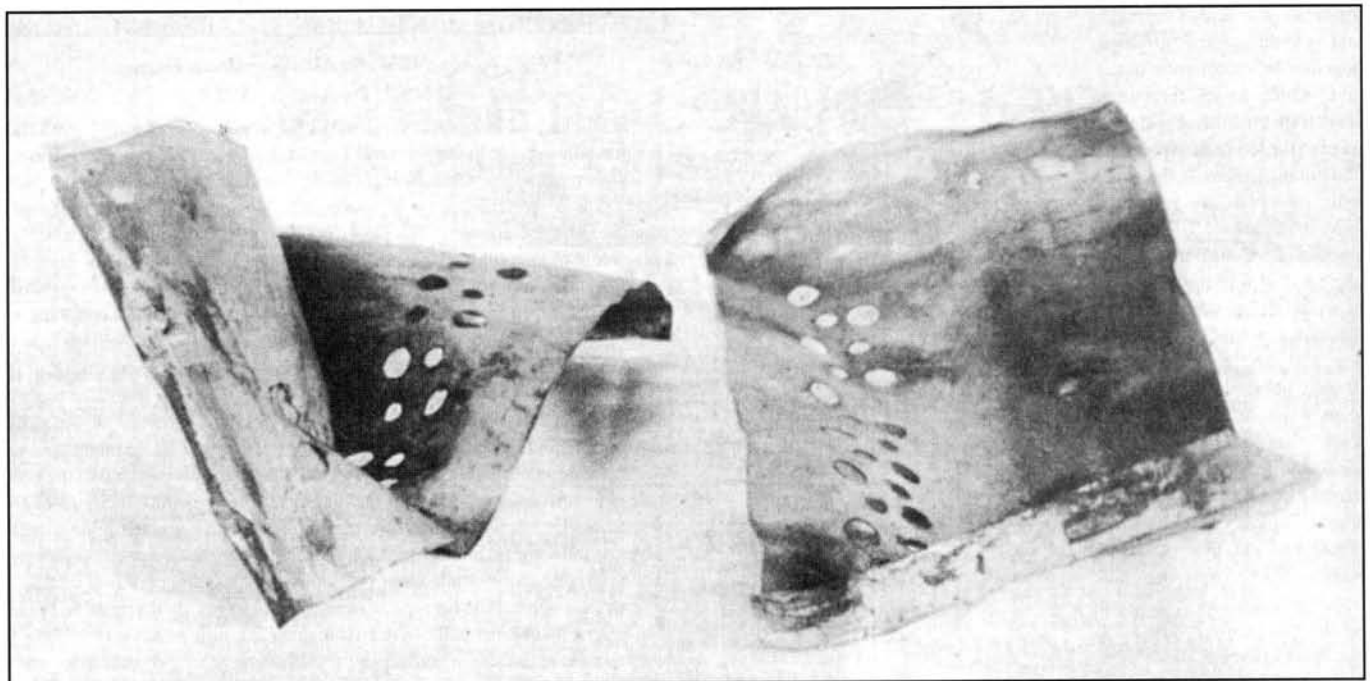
Explosion of a Model Boiler: the casing after the occurrence.
